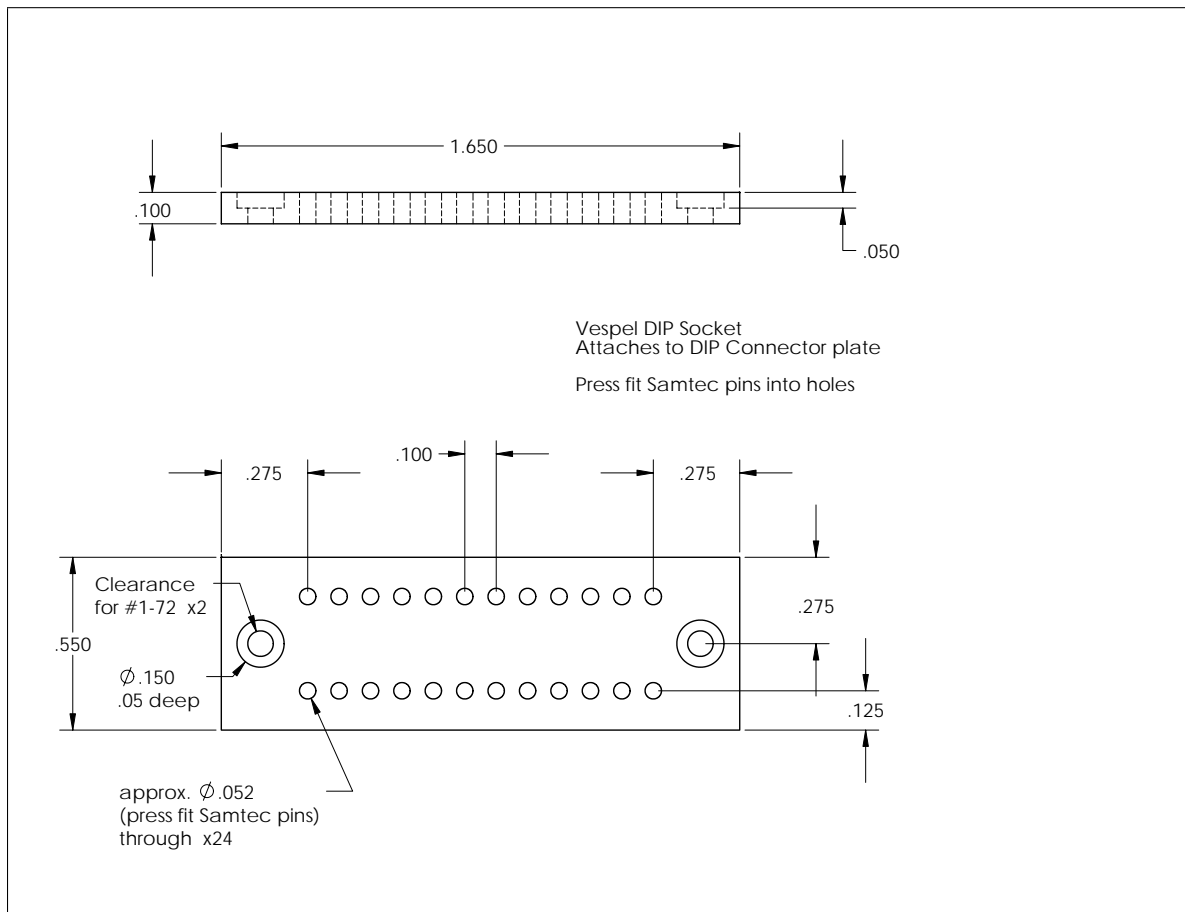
Schematic drawing of the Vespel DIP socket, which is mounted in the respective slot on the DIP connector. Standard gold-plated Samtec SS sockets (removed from their plastic housings with a razor blade) are press fit into the small holes and can accept many different pin shapes and sizes.
